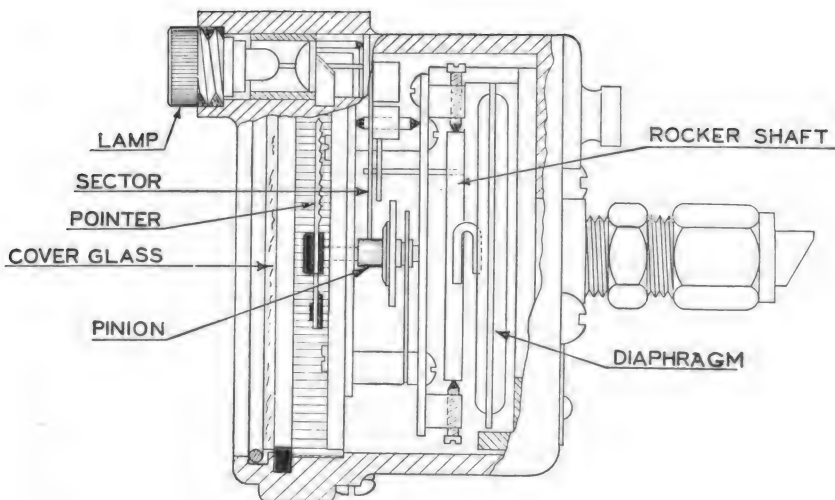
Schematic cross section of a suction gage mechanism.
